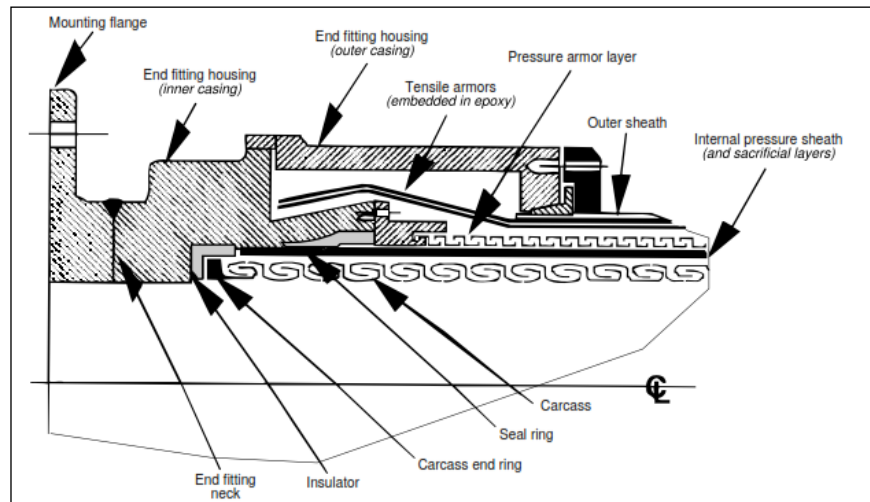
Example of an Unbonded Flexible Pipe End Fitting, [4]
